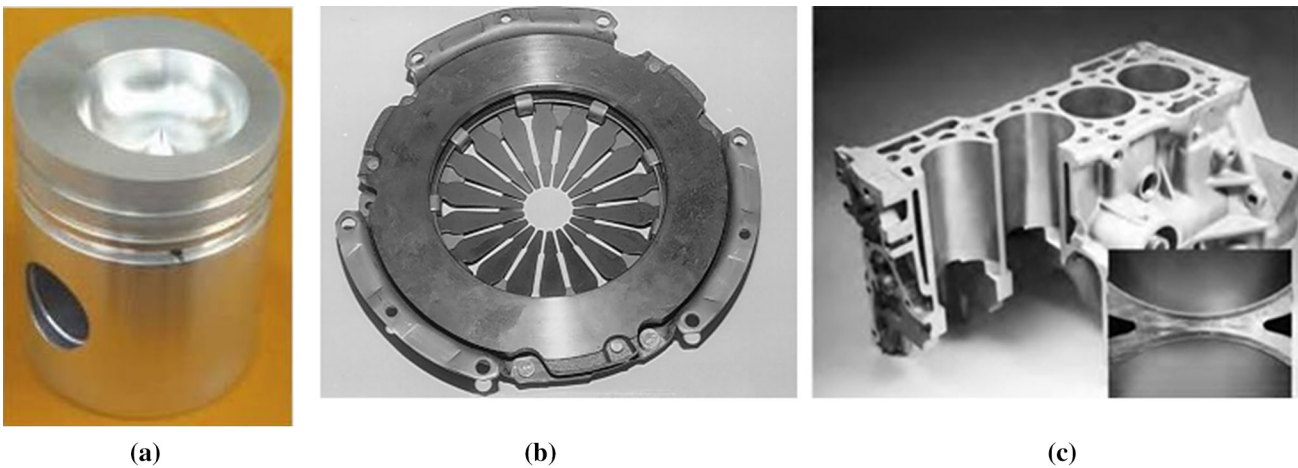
(a) Diesel engine piston selectively reinforced at the top ring groove area by infiltration process,^[134] (b) automotive clutch disk manufactured by preform infiltration of aluminum using High Pressure Die Casting (HPDC),^[135] and (c) cross section of Honda engine block with integral MMC piston liners fabricated by infiltration process. Reprinted from Campbell^[136] with permission from ASM International.
